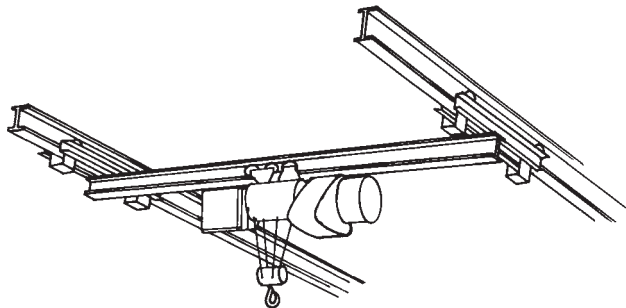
Underhung single-girder crane. (FKI Industries, Inc.)
